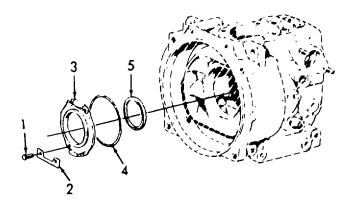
Oil Seal (Flywheel Side) Removal/Installation.
